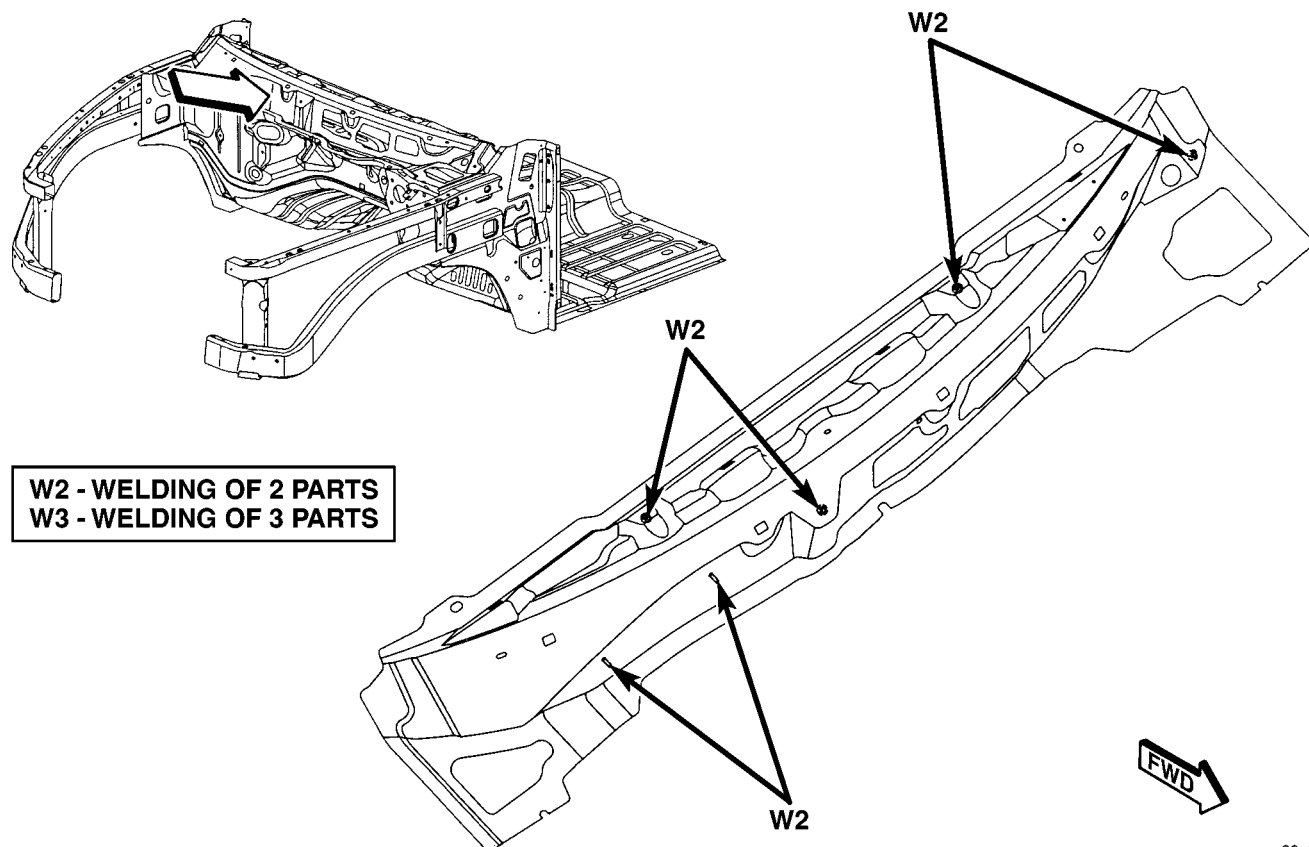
WIPER ATTACHING WELD NUTS
